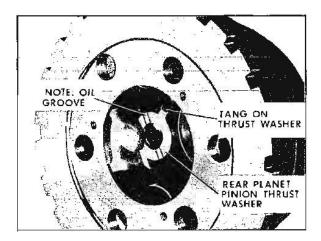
B-91 Installing Lone Pinion Rear Thrust Washer
